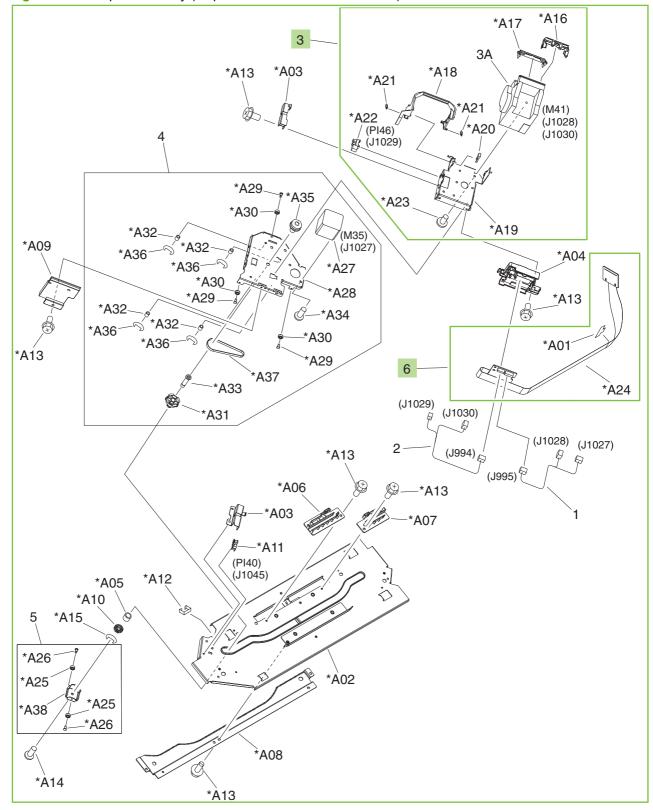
Staple assembly (stapler/stacker and booklet-maker)
